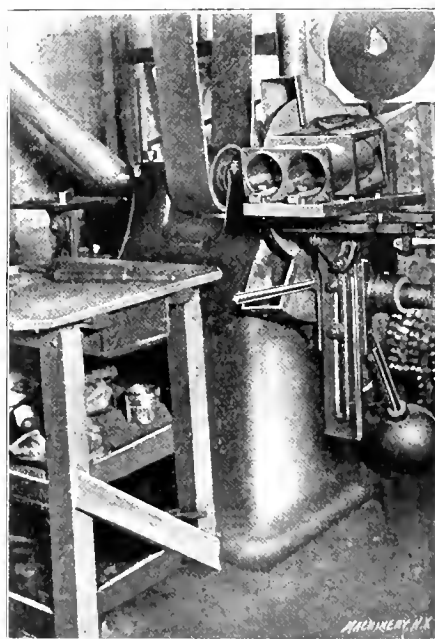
Finishing Seats for Water Jacket Cover on a Besly Disk Grinder
